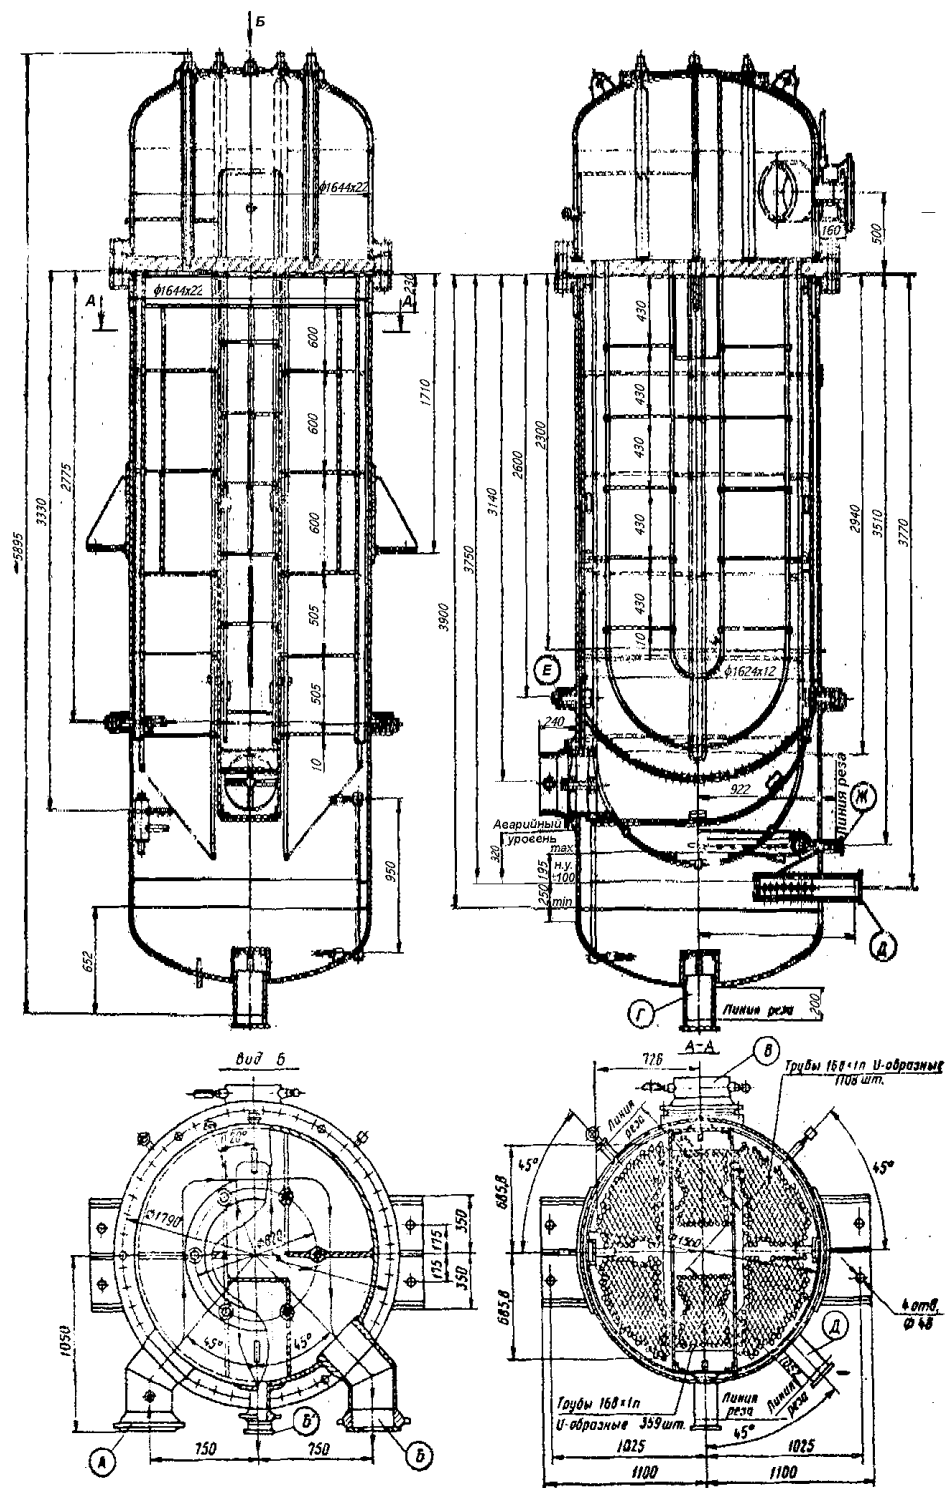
Design of the heater ПН -400-26-7 -I
